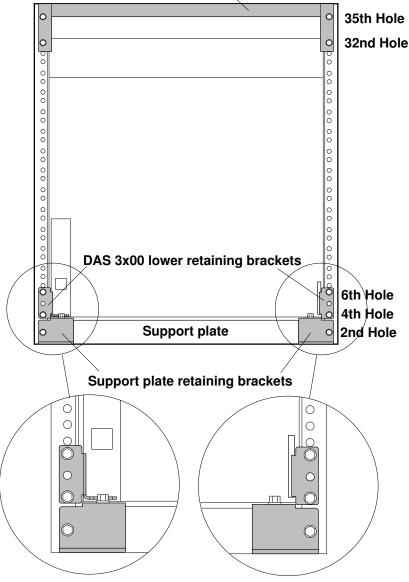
Rear view of the DAS 3x00 and retaining brackets
